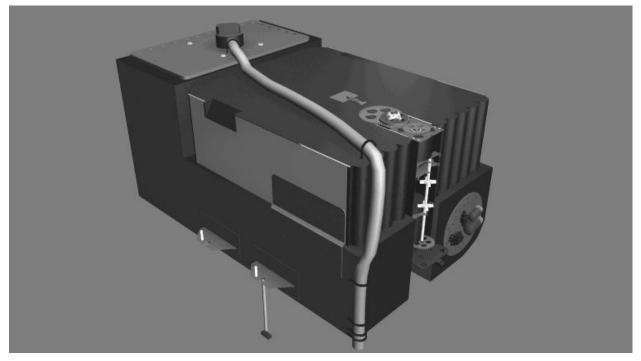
Internal Auxiliary Fuel System (IAFS) Combo-Pak
